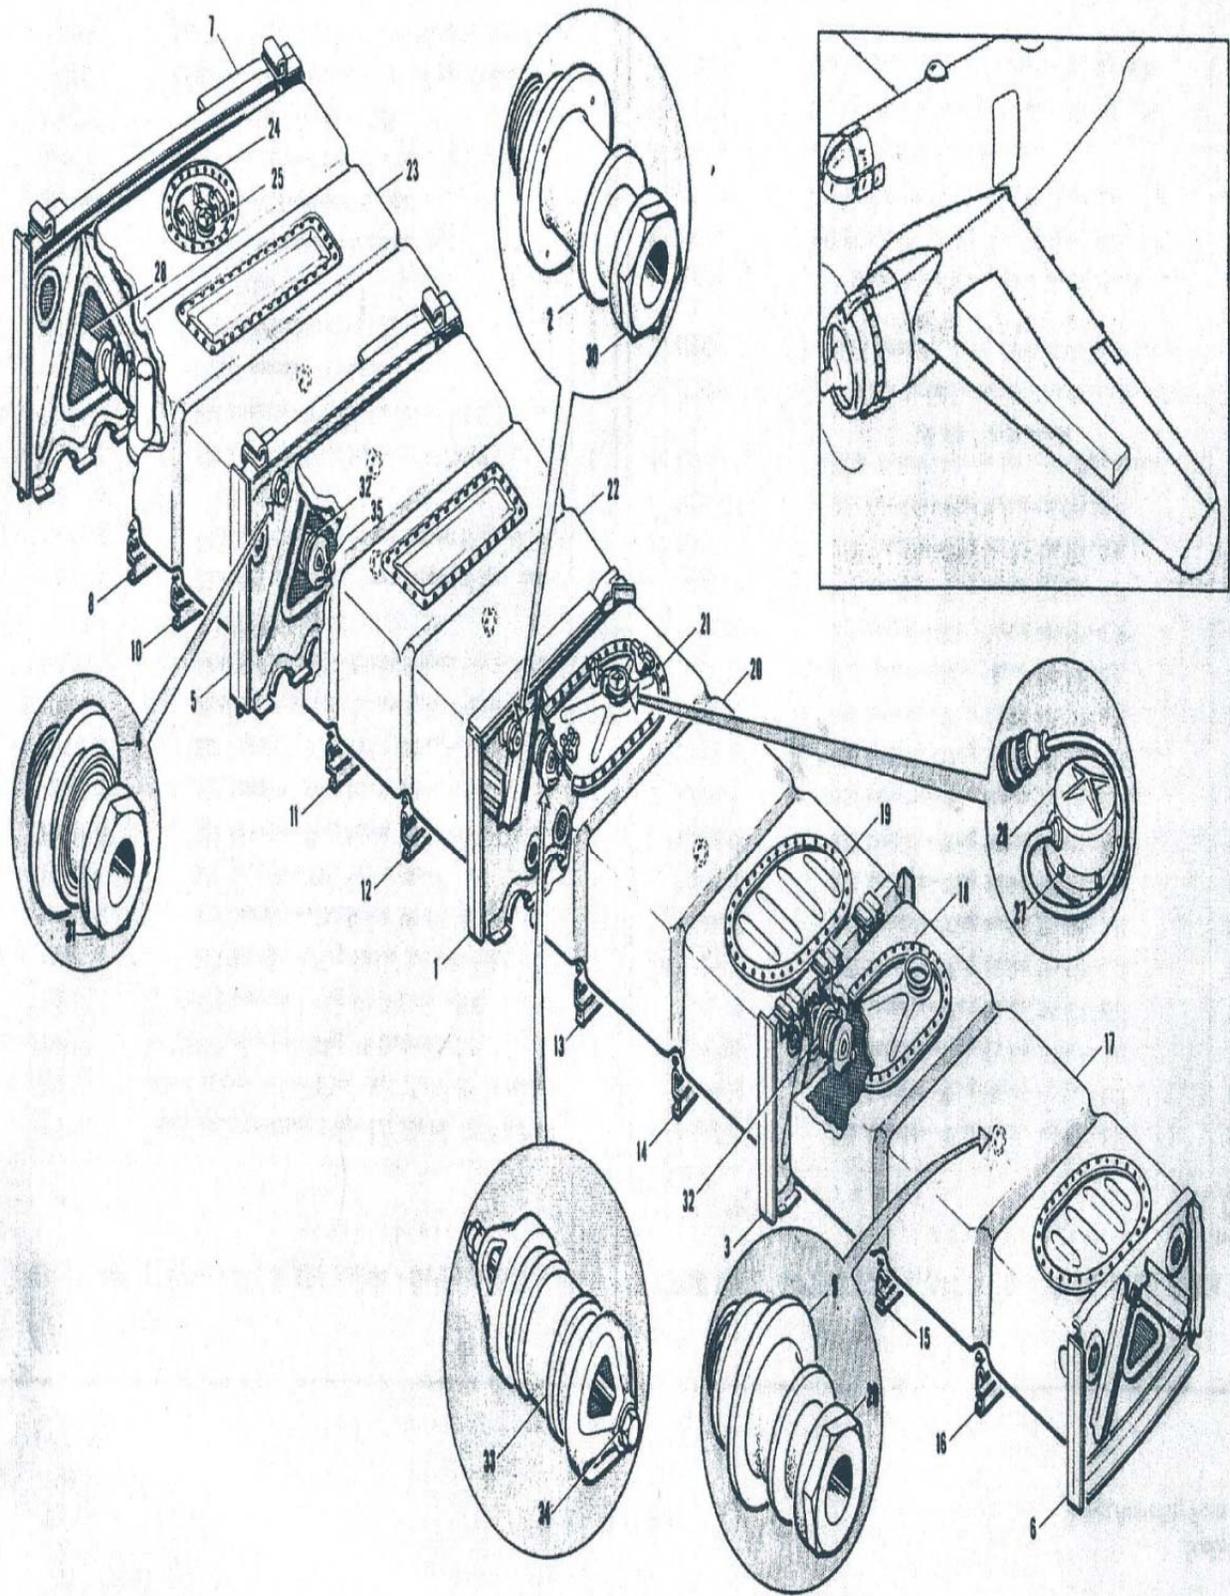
Section Assembly - Outer Wing Panel Tank - L.H. and R.H.
